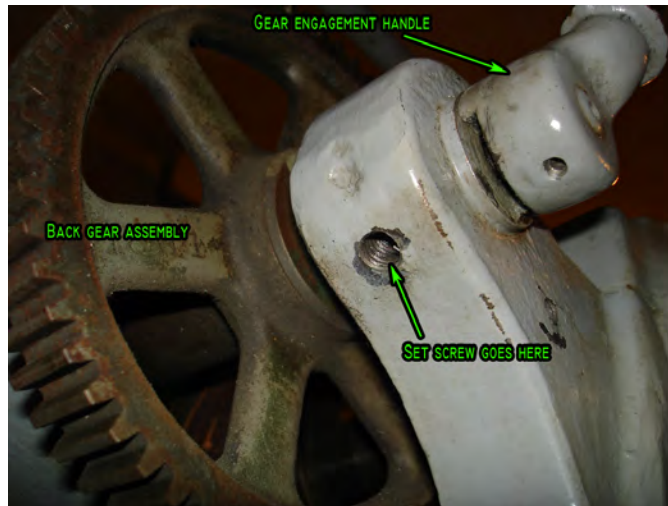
Set screw below the engagement handle that retains the back gear shaft.
